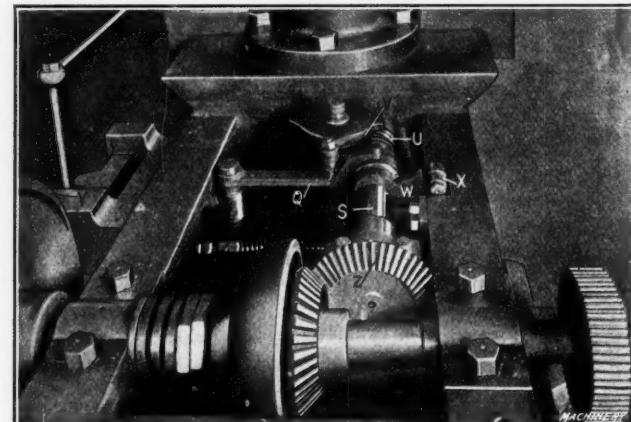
Close View showing the Indexing Mechanism located under the Table which has been removed
